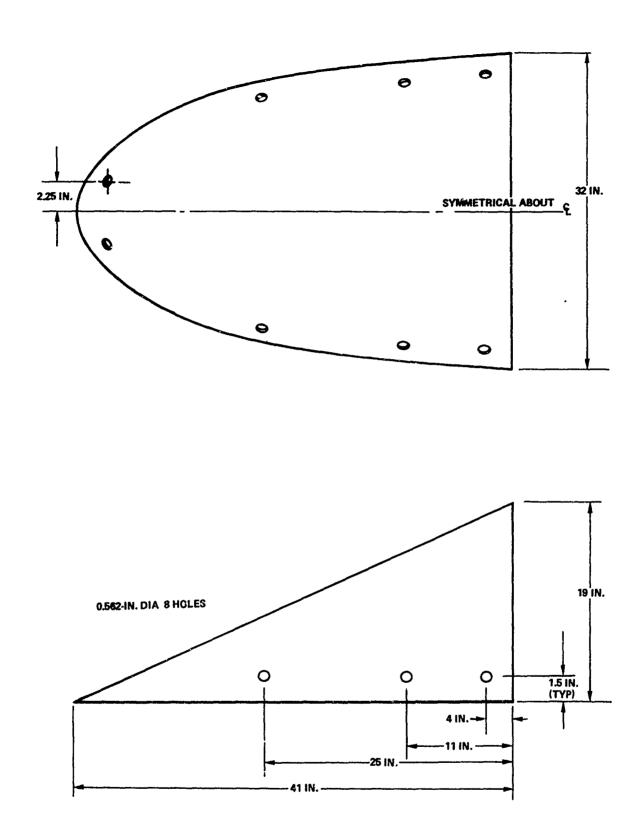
Single-Piece Cone Wedge Section Type Windshield Attach Bolt Locations
